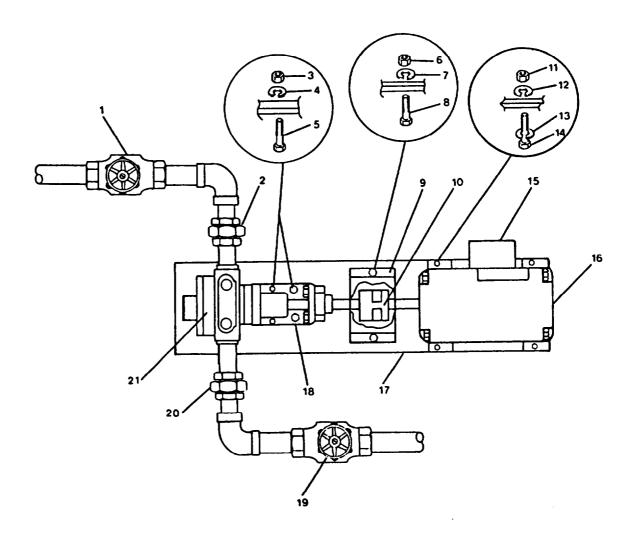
Rotary Pump Unit (Fuel Oil Transfer). Repair.
